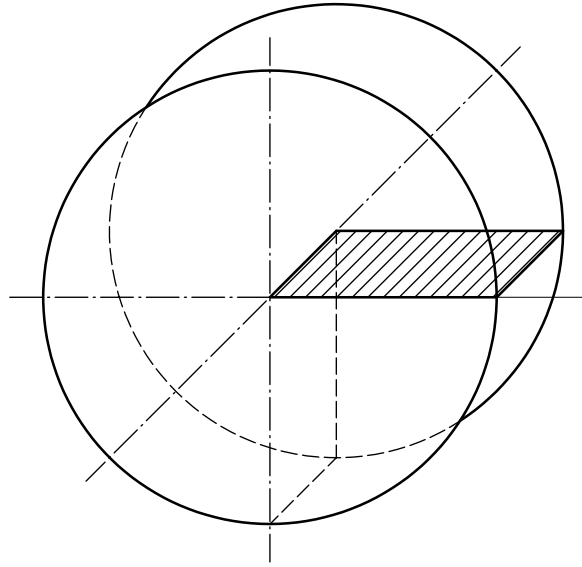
Sample from bar or billet with a diameter or length of side > 25 mm and ≤ 40 mm
